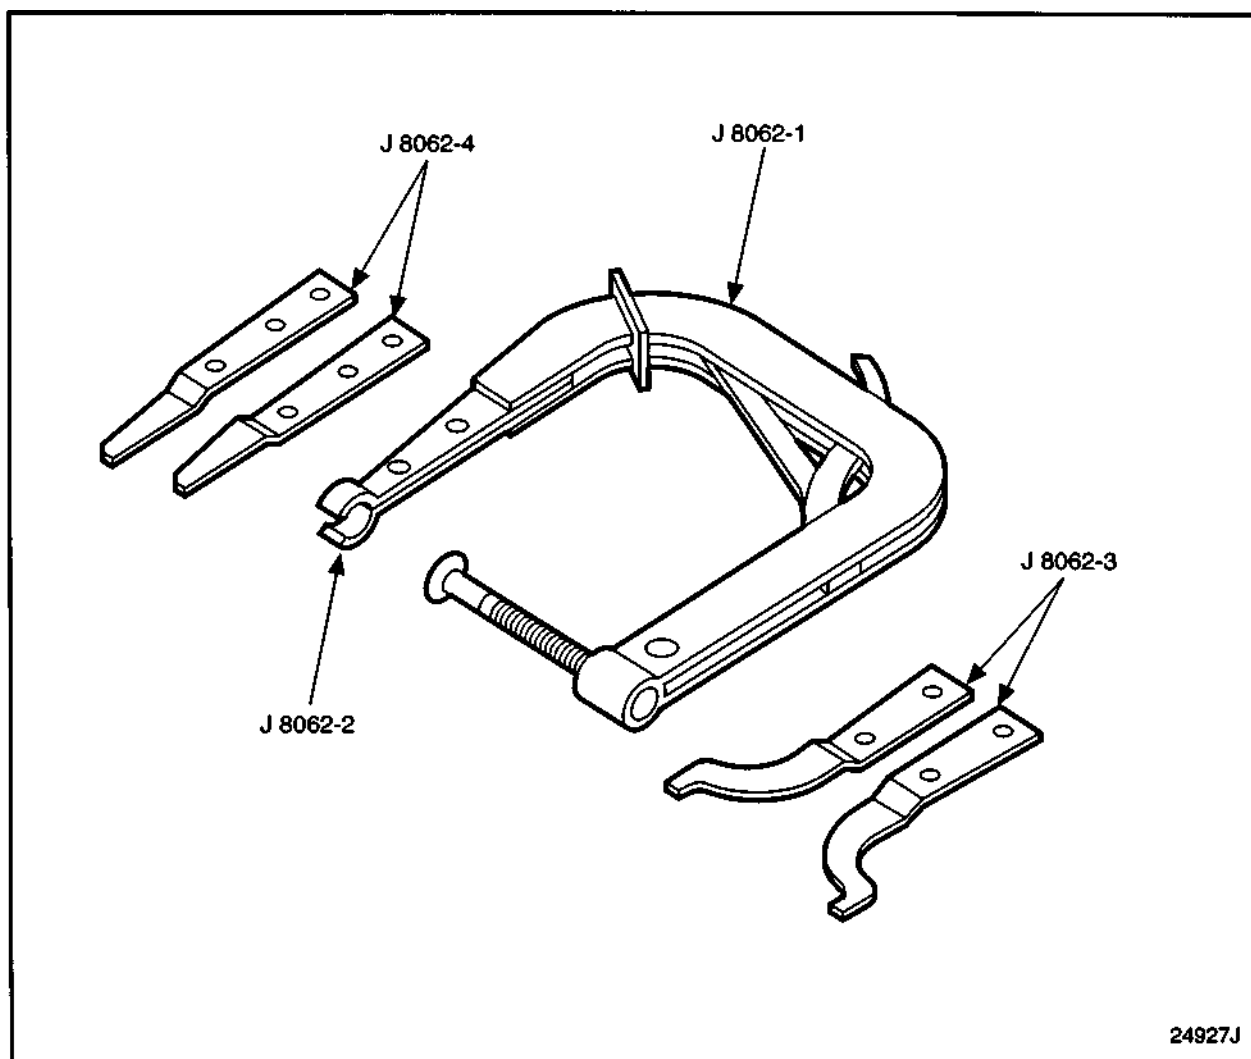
Valve Spring Compressor CYL HD OFF,J 8062
